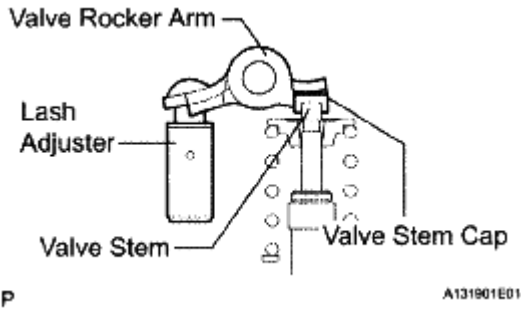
Applying Engine Oil To Lash Adjuster Tips And Valve Stem Cap Ends
